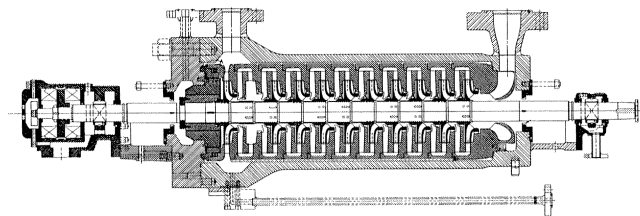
Section, 6 Inch Discharge 11-Stage FCC Hydrotreater Charge Pump.
